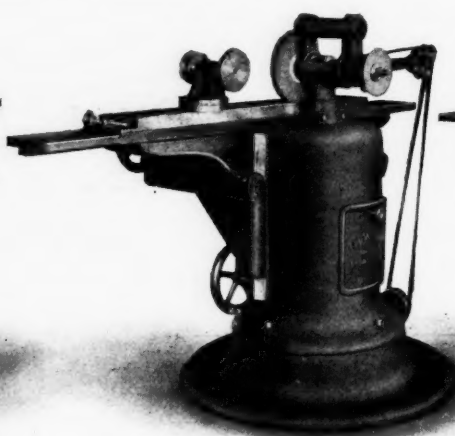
Table Reversed and Head in Place for Face Grinding.
